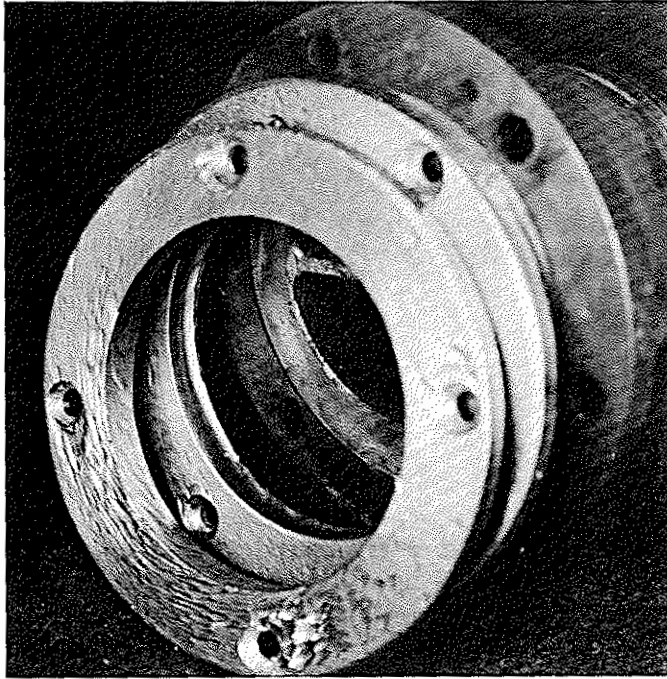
Borate erosion to parts of a pump. (Arcadia Equipment Development Center tests — 1957.)
